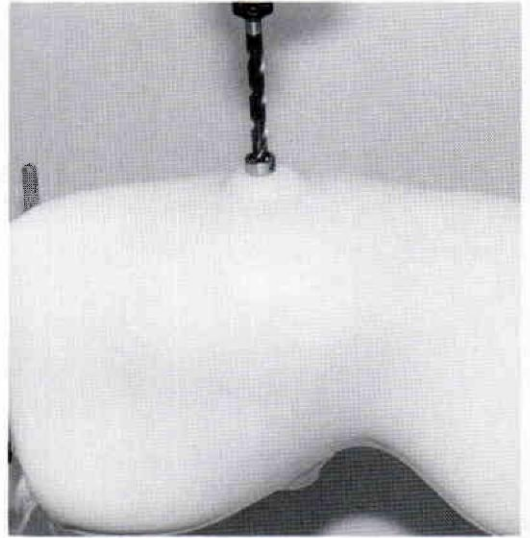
Drill used to open up the holes in the polyethylene over the lug mounts.
